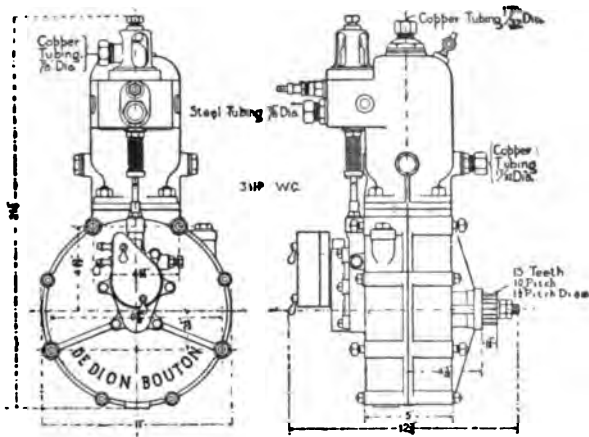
Rear and Side Elevation of a De Dion Water-Cooled Carriage Motor, showing method of joining the two halves of the crank case and bolting them to the cylinder. As indicated, also, the water-jackets, cylinder head and valve chamber are cast integral with the cylinder.
